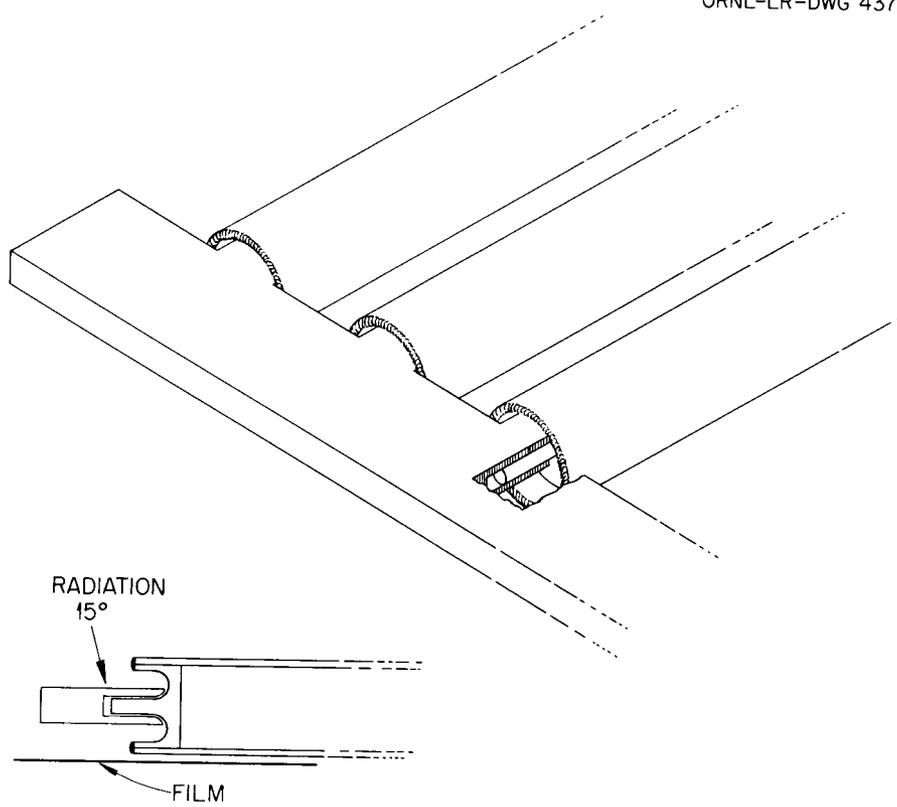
Masking Technique for the Radiographic Inspection of EGCR Fuel Capsule Closure Welds.
